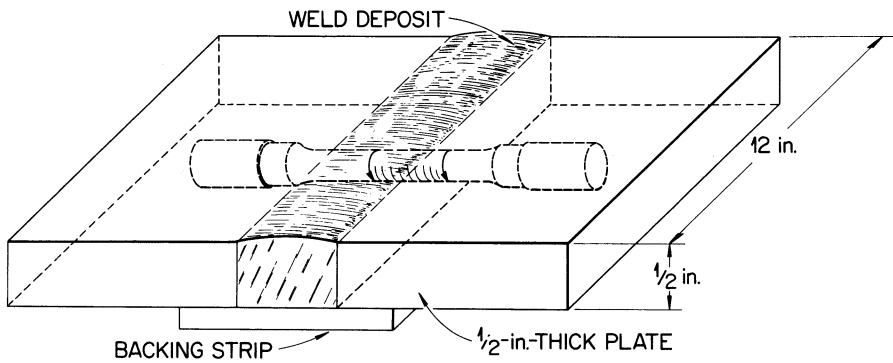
Weld test plate design showing method of obtaining specimen.
